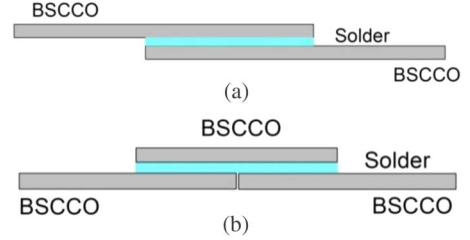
Two joint geometries, (a) lap joint and (b) bridge joint.
